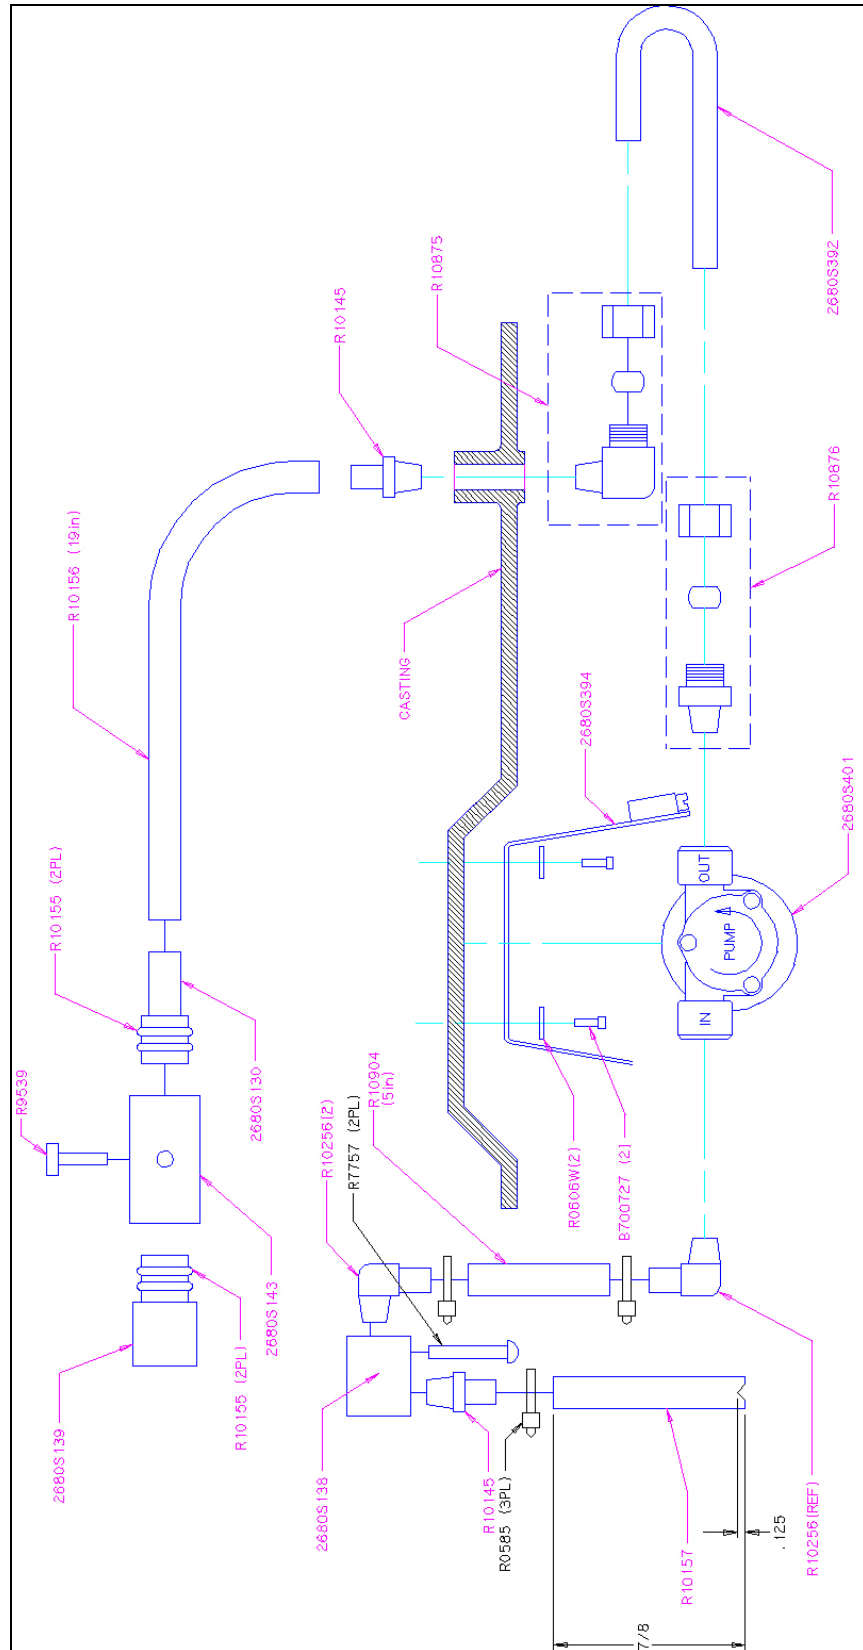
Pump Assembly Exploded Diagram (2780S804)
